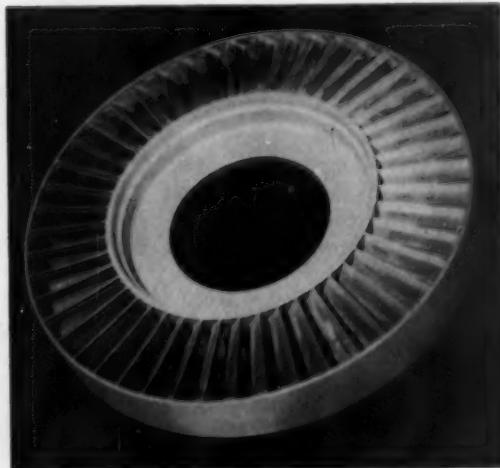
Industrial torque converter part produced by Alcoa for American Machine & Foundry Co. Each pair of twin blades is separated by 0.040 in. Blades were cast using plaster cores.
